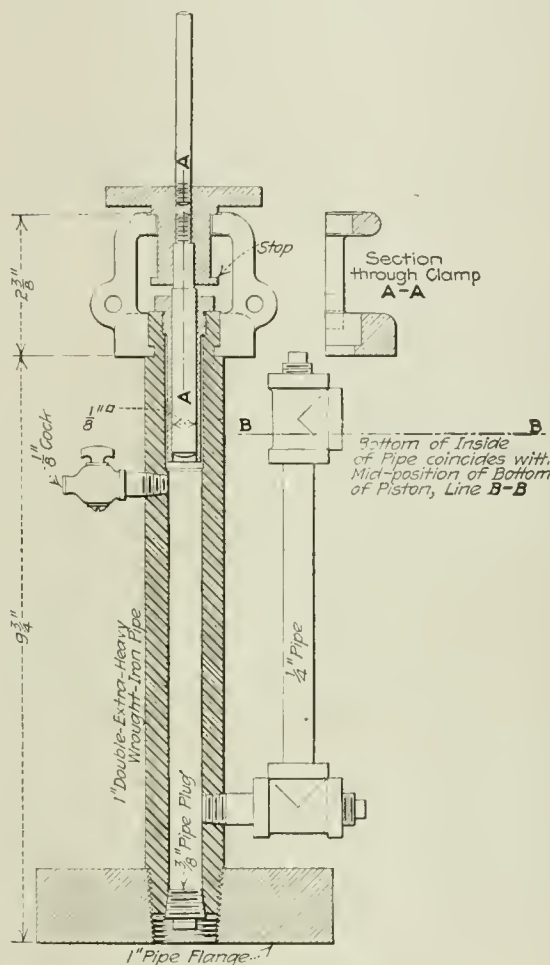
SECTIONAL VIEW THROUGH DEAD-WEIGHT PRESSURE GAGE
